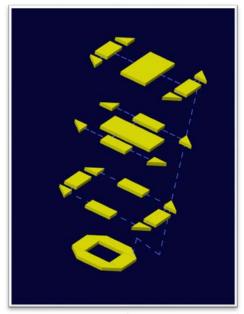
HAL Nose foam stack top half assembly model in exploded view
